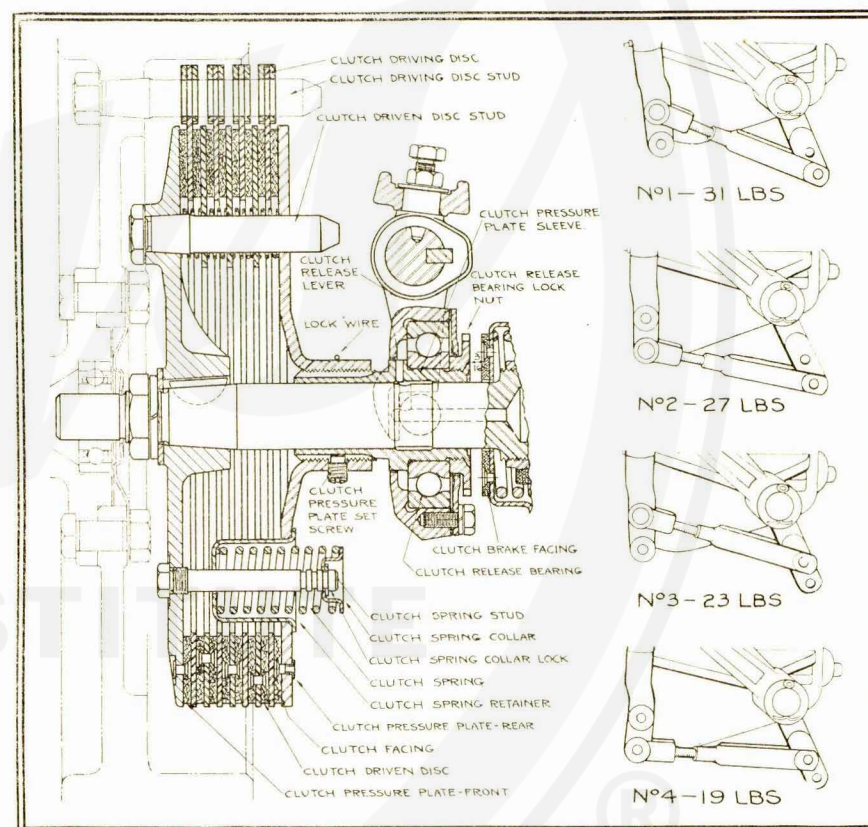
Cross Section Showing Clutch Details, and Method of Adjustment
